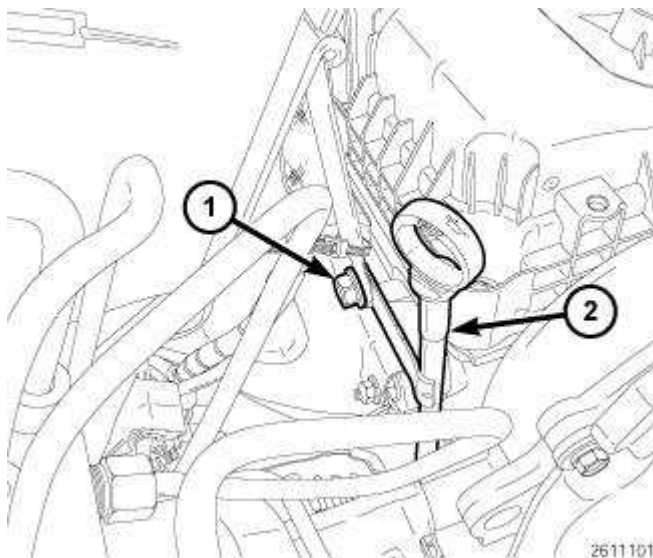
Engine Oil Level Indicator Tube Retaining Bolt And Indicator Tube
